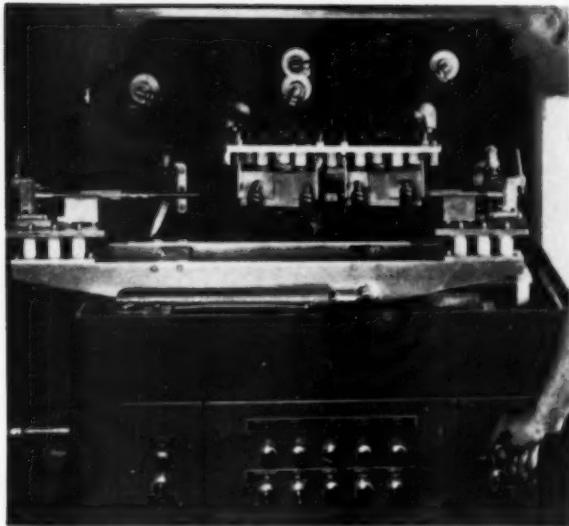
Machine for Hardening (and Drawing Back Slightly) an Appropriate Length of Spline and Bearing. One starter shaft is in fixture at left while operator unloads fixture at right
